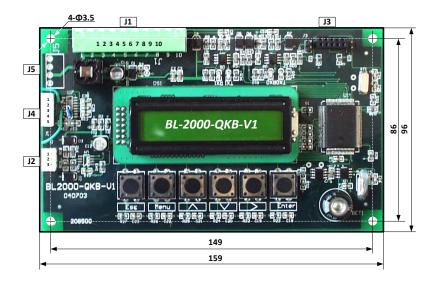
GROUP CONTROL BOARD BL2000-QKB-V1 SHAPE & DIMENSION
